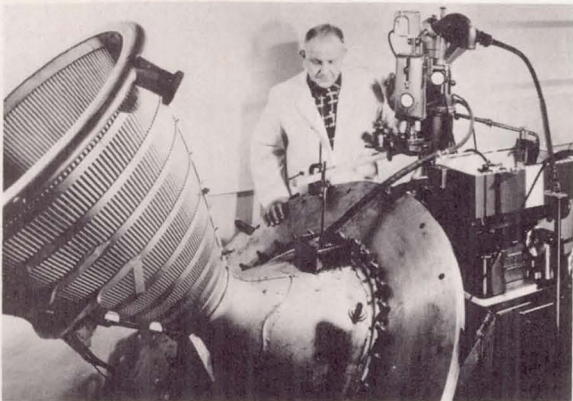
General view of rocket nozzle. Electric-discharge machining.
